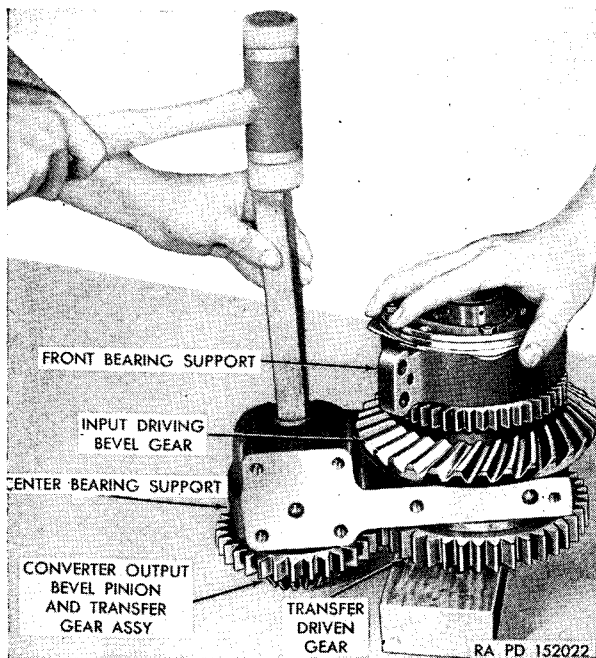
Removing converter-output bevel pinion and transfer gear assembly.
